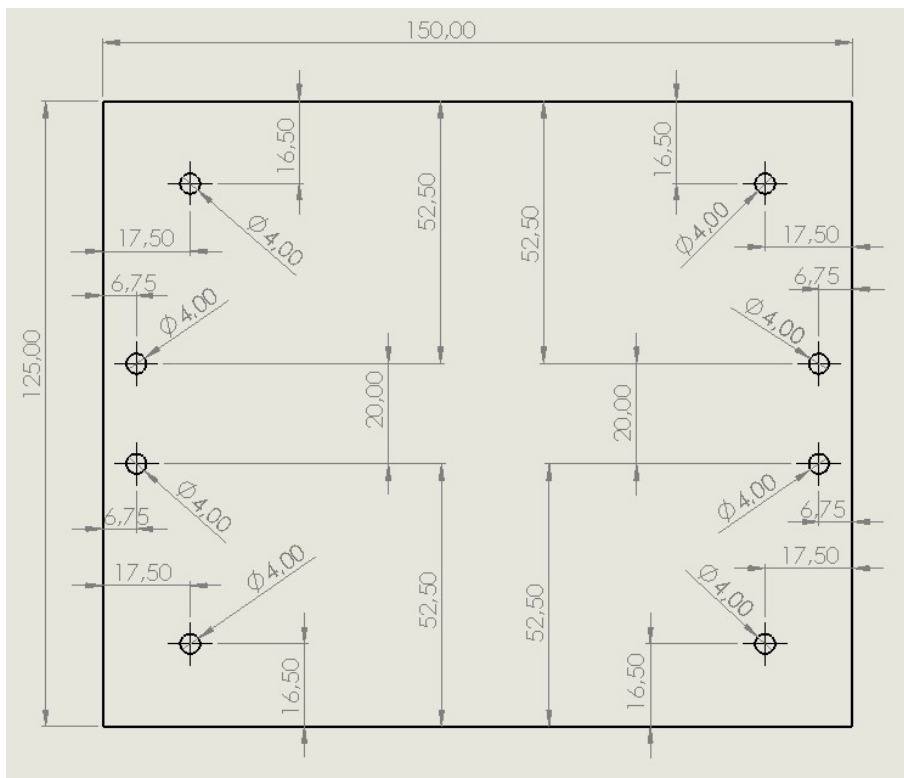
2D drawing of the aluminum support plates for the Controller Board.
